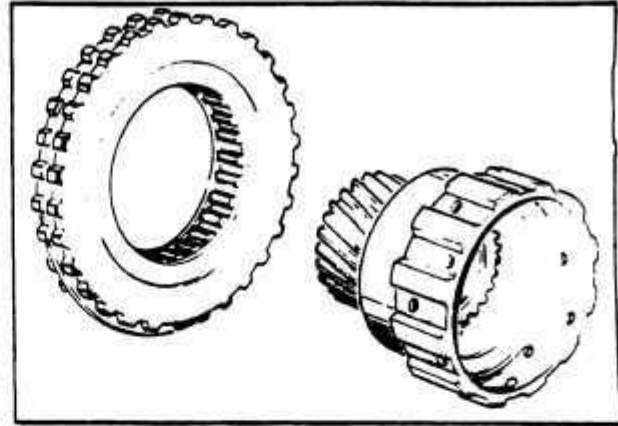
INPUT GEAR ROLLER CLUTCH ASSEMBLY
